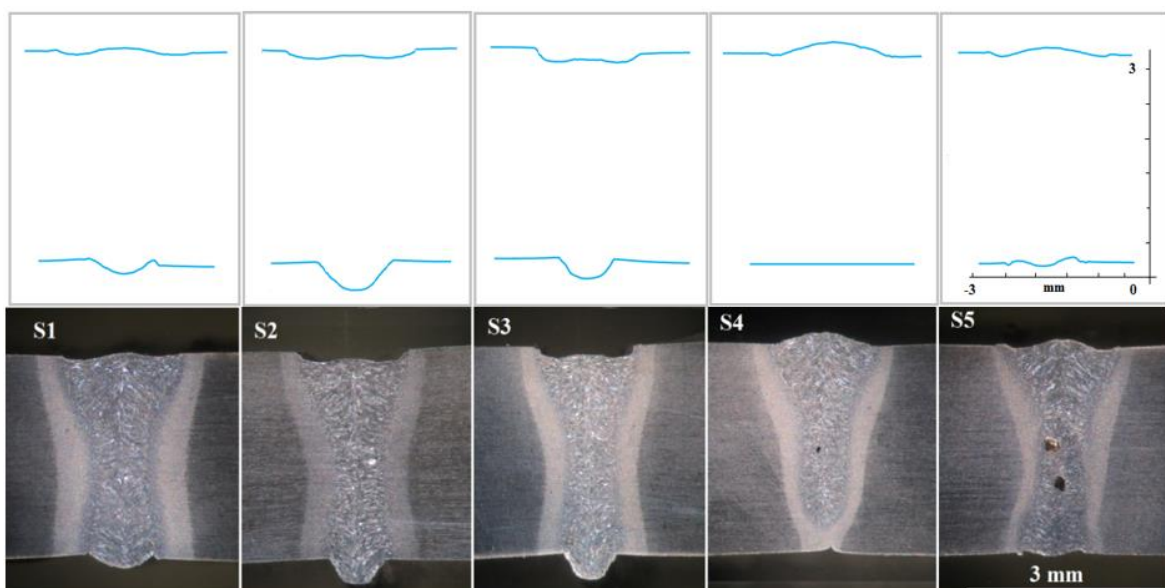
Appearance of the weld beads for welded series: profiles (above); macrographs (below).
